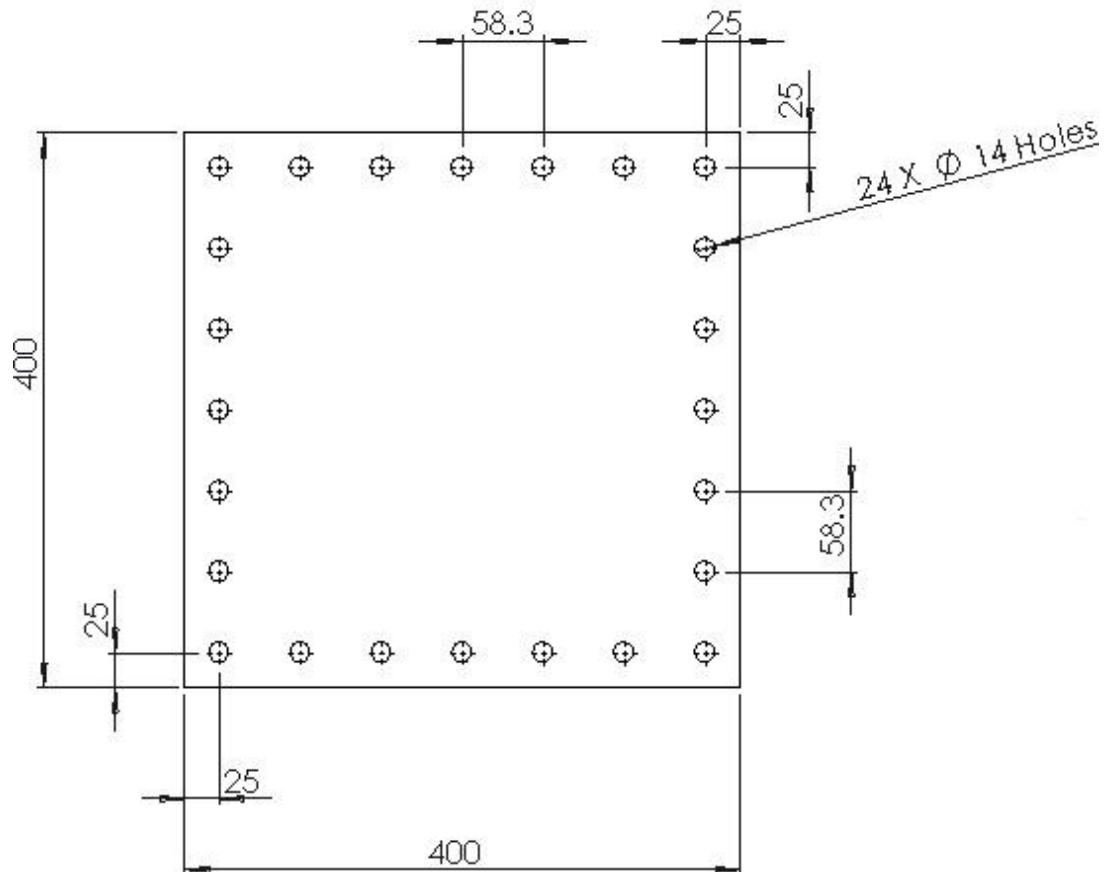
Drawing of the 400mm x 400mm, 3mm Thick Test Plate
